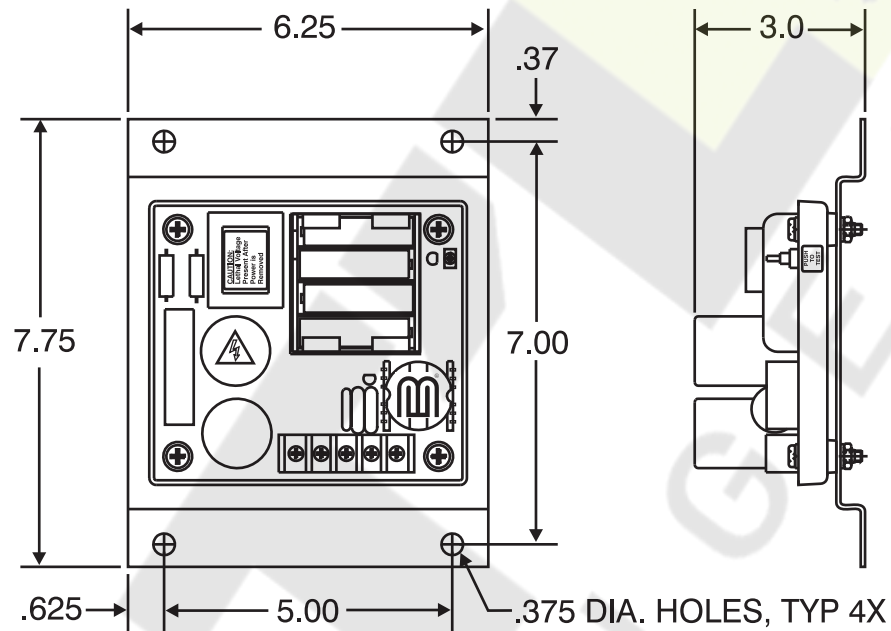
DIMENSION DRAWING, OPTIONAL CONVERSION MOUNTING PLATE FOR REPLACING BASLER MODEL ESD-200
